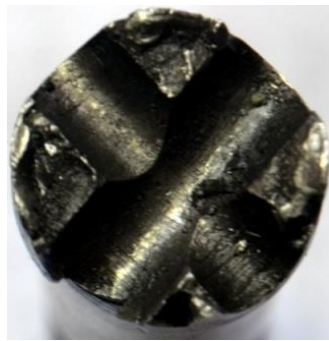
Macro photograph of power screw fracture on the crank mechanism of the shearing machine that has broken in the area of peg hole (pen)
